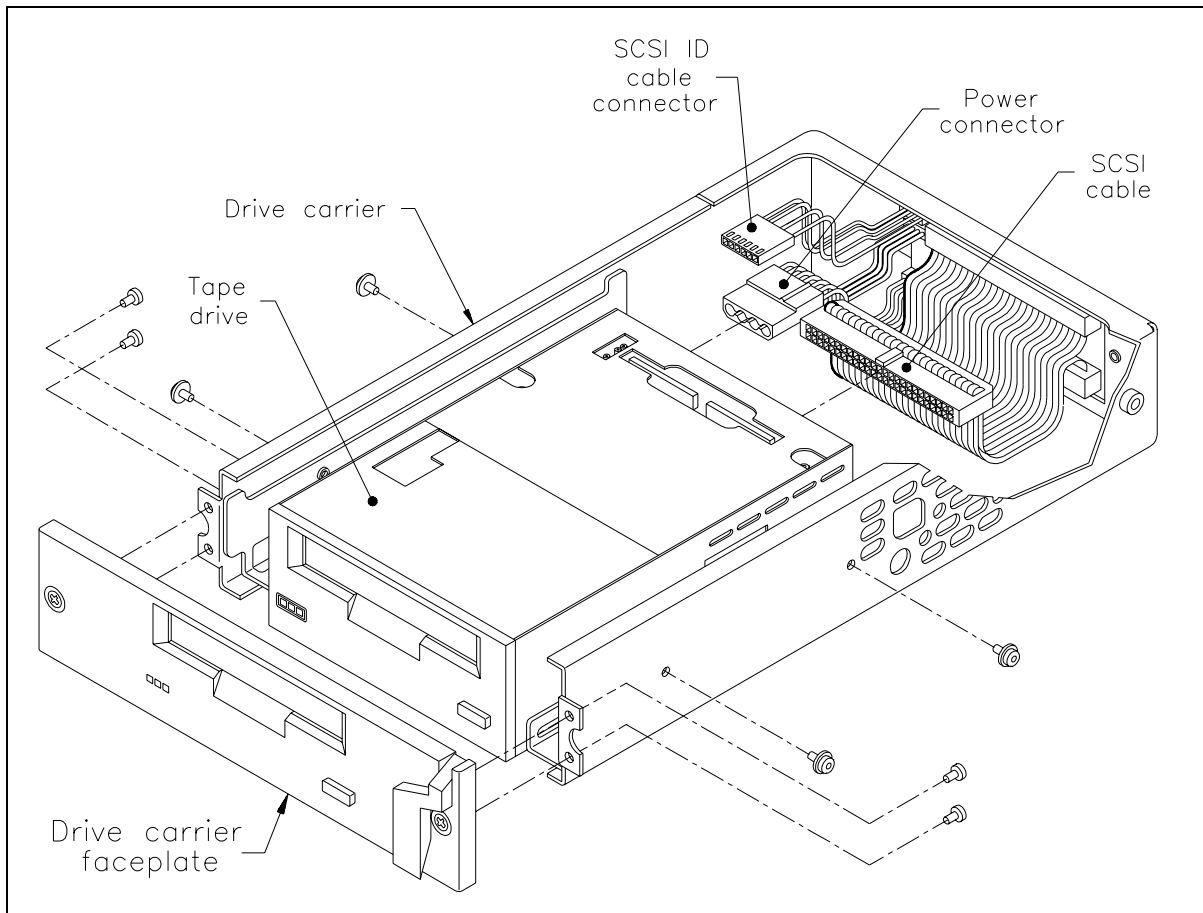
Tightening the screws and connecting the cables to a Hewlett Packard tape drive
